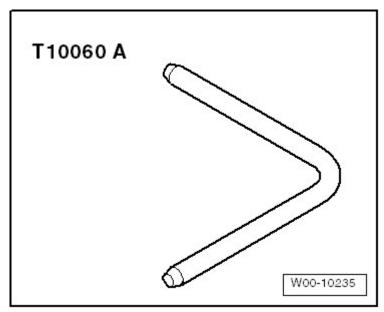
Identifying Locking Pin T10060 A Courtesy of AUDI OF AMERICA, LLC
